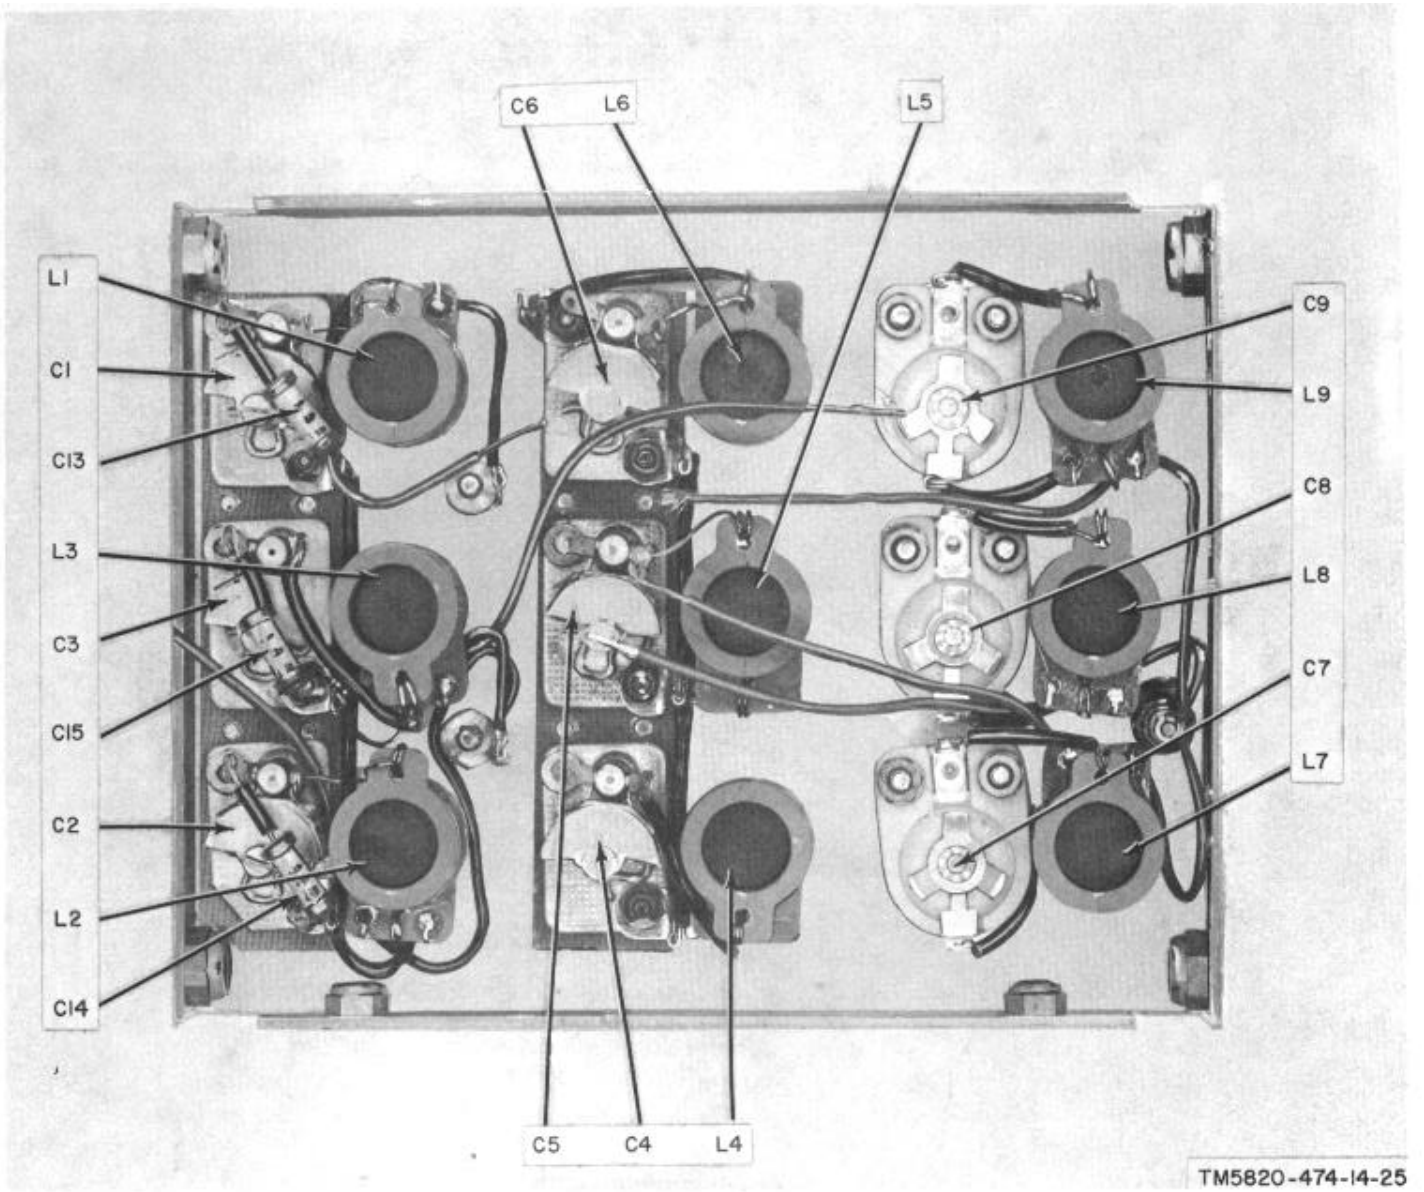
Receiver, bottom inside view of rf- if, chassis.
